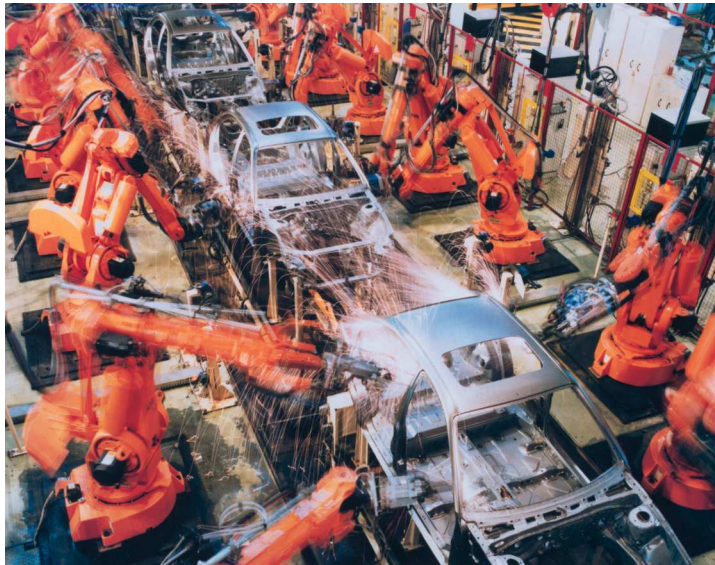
A spot-welding line using ABB IRB 6400 robots (ABB, 2004).
